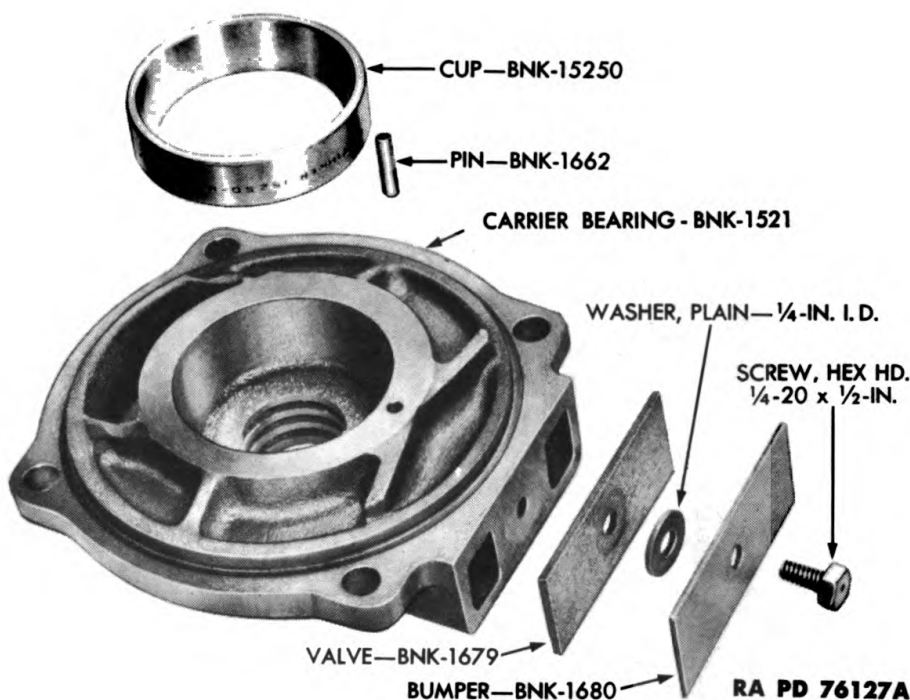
Air Compressor Bearing Carrier With Bearing Cup and Breather Valve Removed
